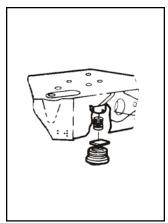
DISCHARGE VALVE, VALVE STOP AND SEAT
